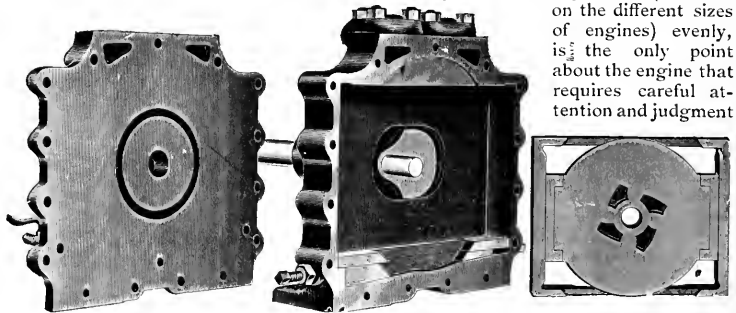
DAKE ENGINE, SHOWING PISTON WITH CYLINDER COVER REMOVED.
